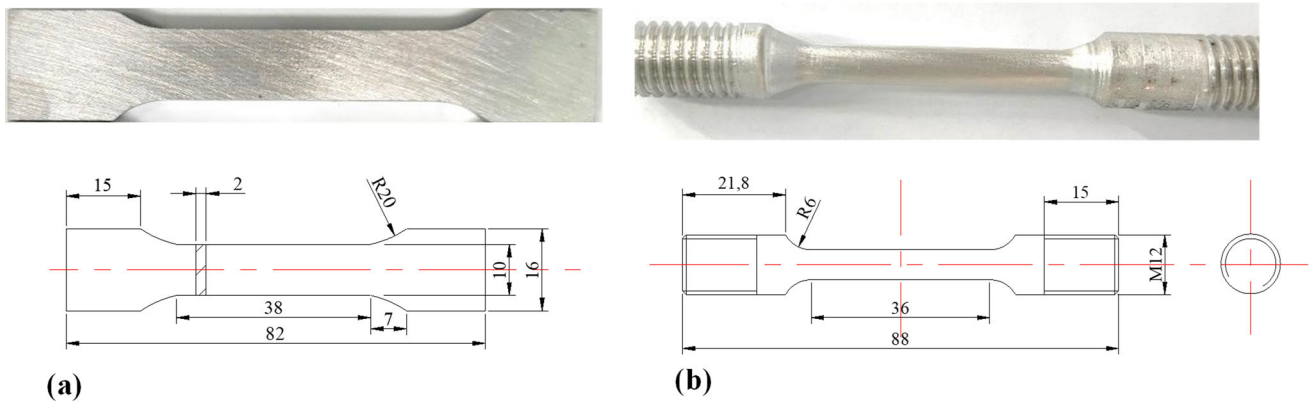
Photographs and dimensions of the tensile specimens used for testing at: (a) room temperature and (b) 350 °C
